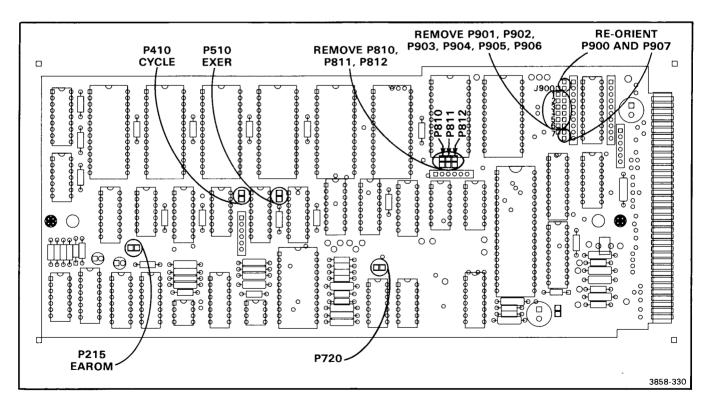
Configuration of jumper connectors on MPU Board for Forced Instruction Freerun.
